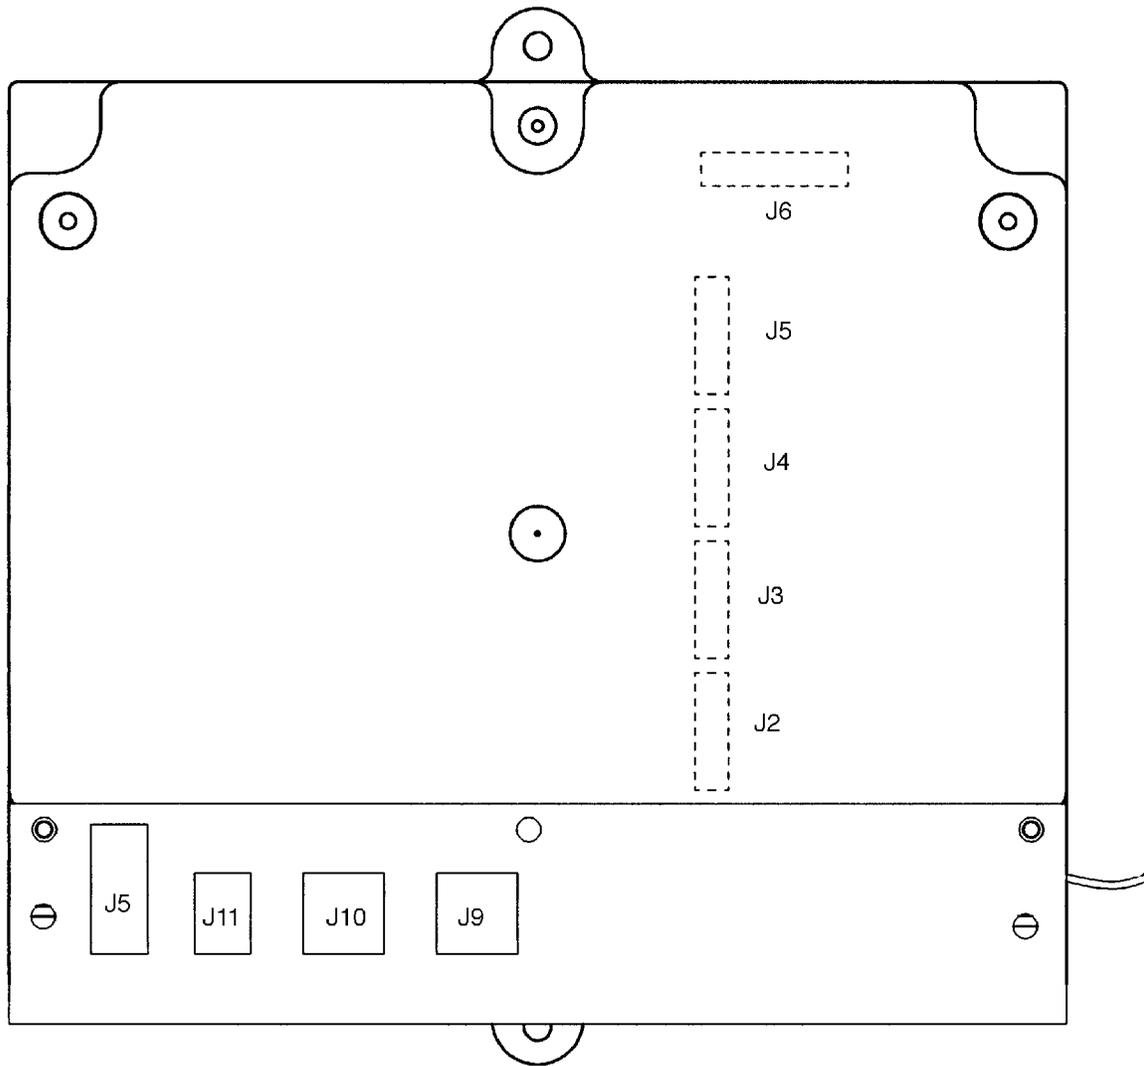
ISB INTERFACE BOARD CONNECTOR PINOUTS FOR BLENDER. Refer to Table A-3.
